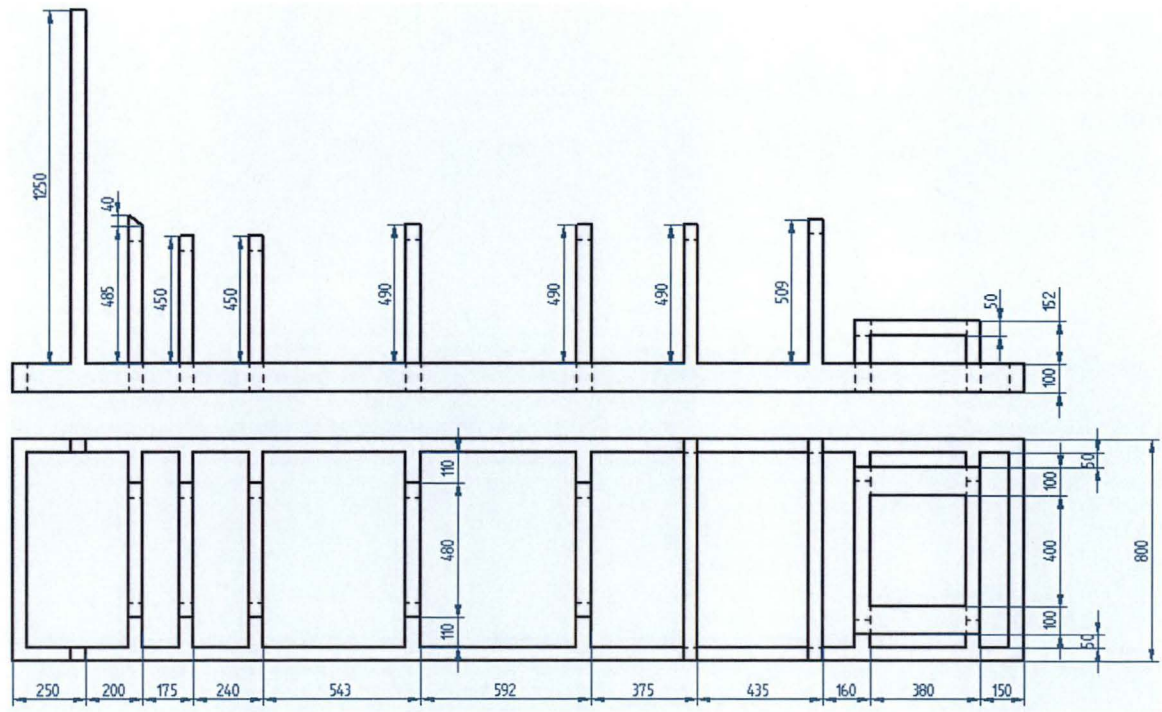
Steel support frame for the experimental draft tube model (All dimensions in mm)
